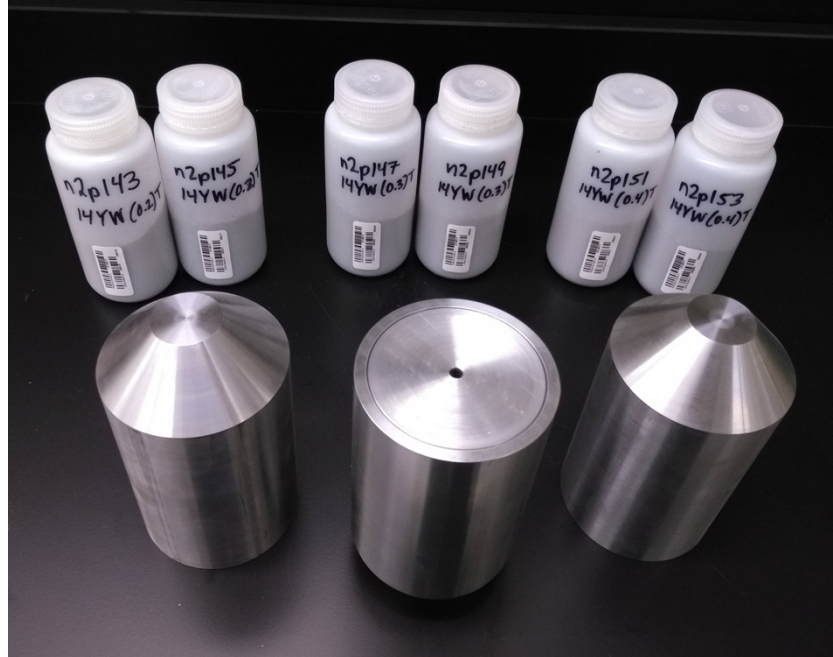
Image showing the 3.9 in. diameter x 5.5. in. long cans and lids fabricated from mild steel and the plastic bottles containing the ball milled powder of the three new 14YWT heats.
